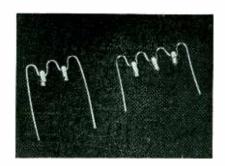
Tungsten heater wires with aluminum slugs in place ready for evaporation. Assembly at left is for ten-inch picture tube; at right for twelve-inch
